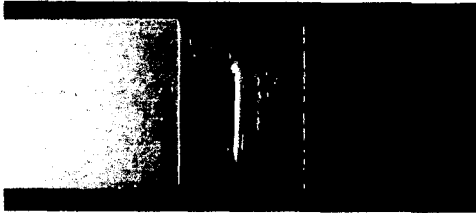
(a) Fracture appearance of the tensile test specimen Butt-jointed by FSW<sup>8)</sup>
